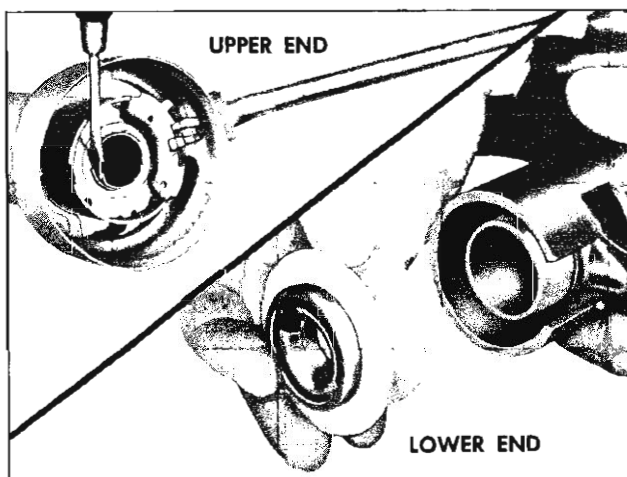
Shift Tube Retainer Ring, Washer and Lower Bushing
